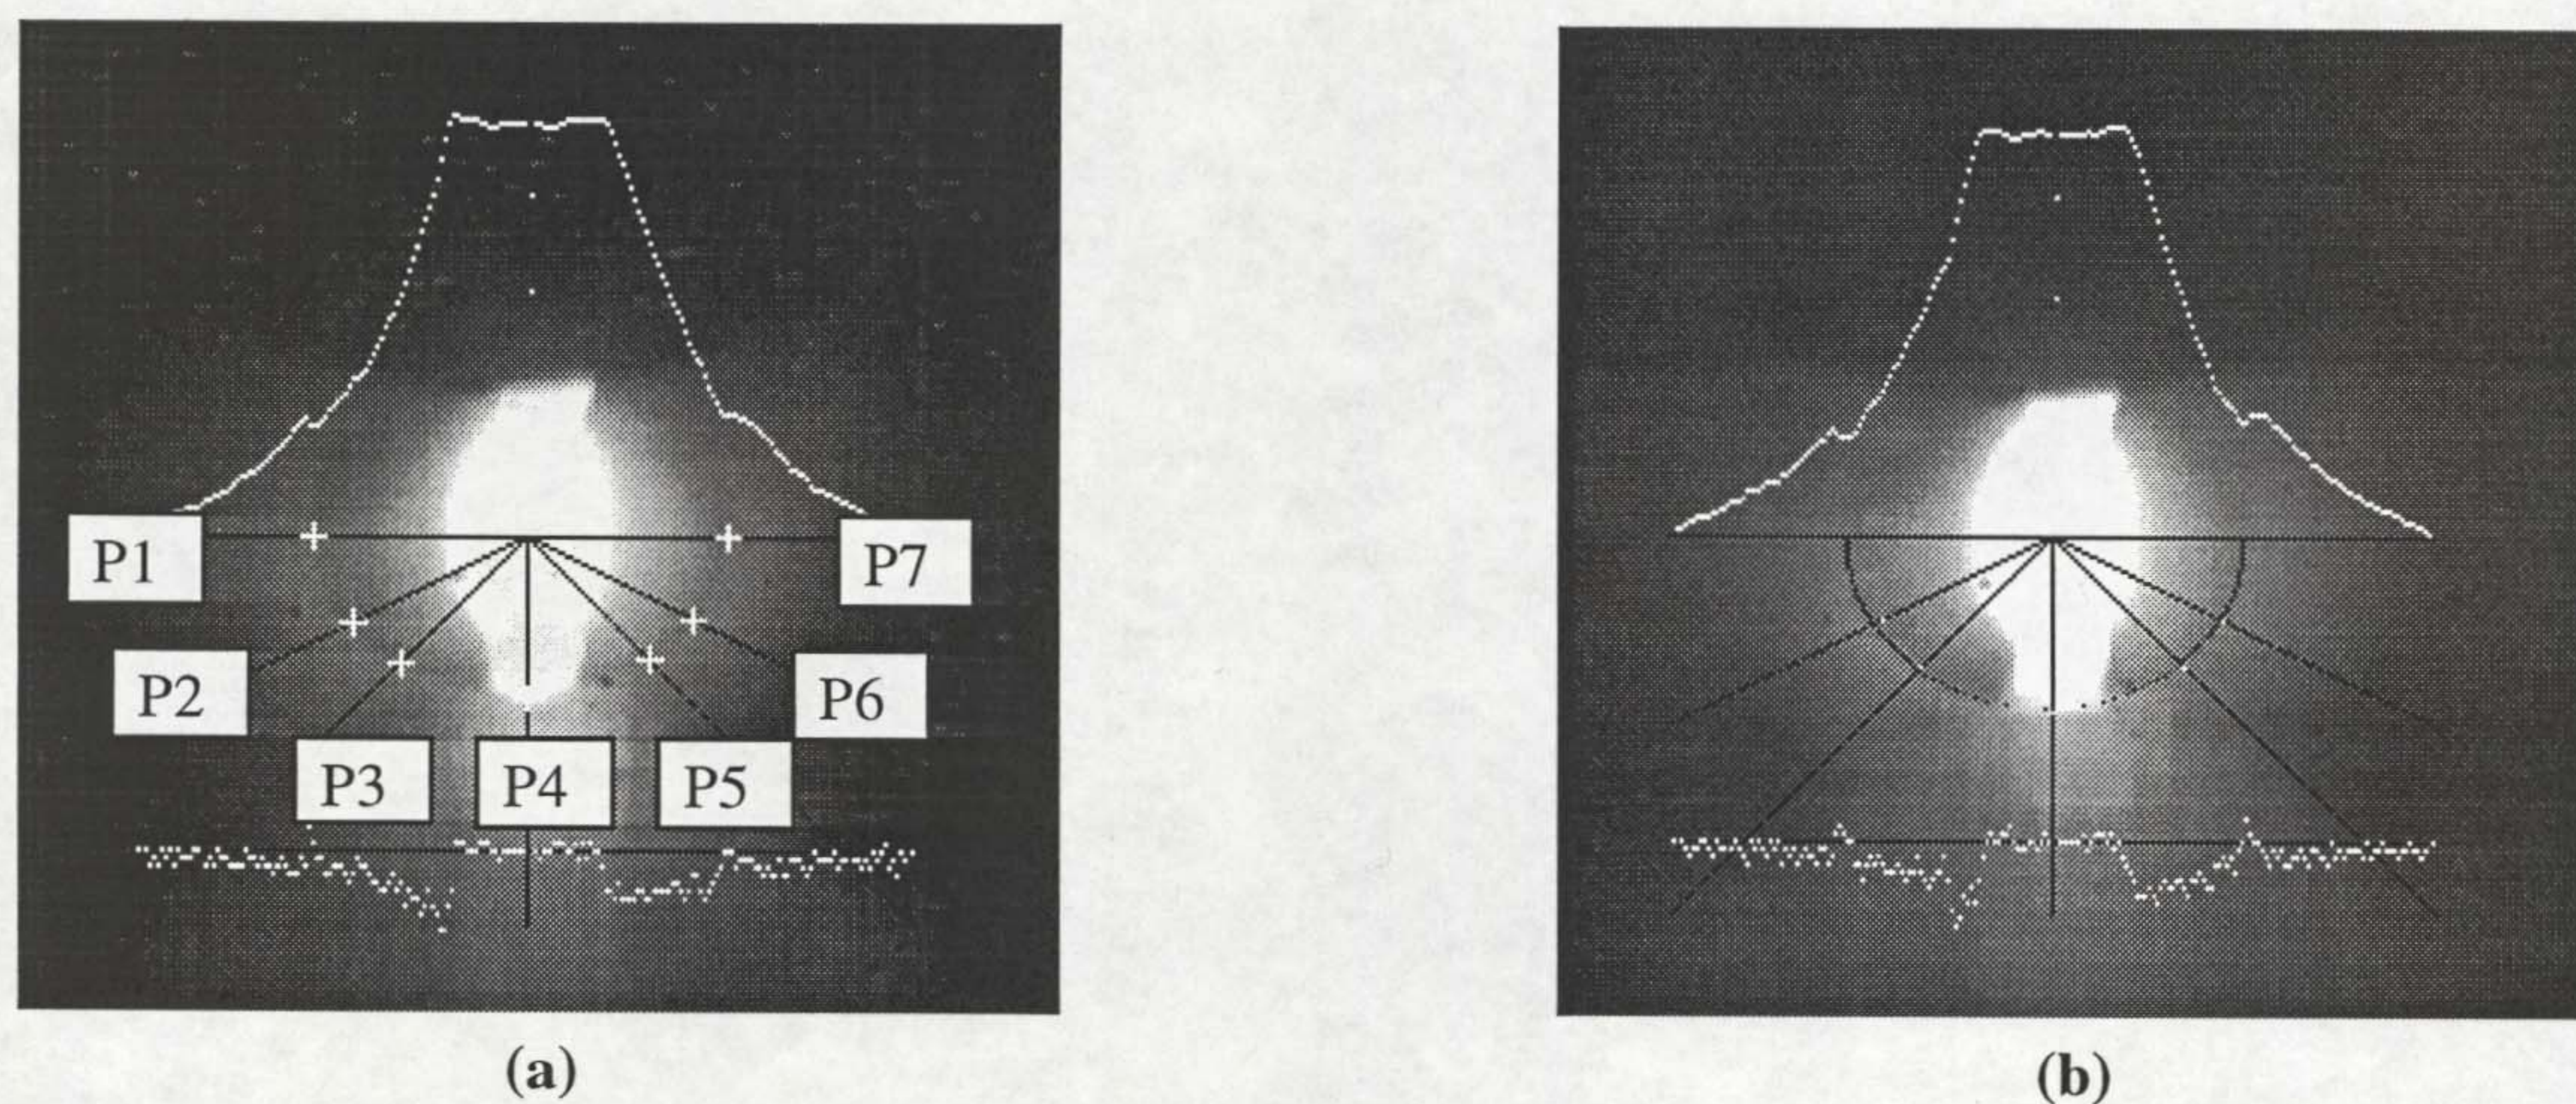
DC TIG Welding on Stainless Steel
